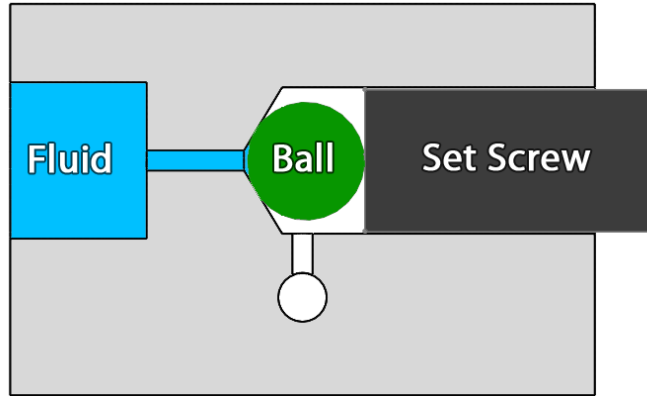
Diagram showing the working principle. A steel ball is pressed against the opening by a set screw to close off the fluid. When the fluid pressure is to be read, the set screw is backed off and the ball is pushed back by the fluid and can enter the channel (below) that routes to the sensor.
